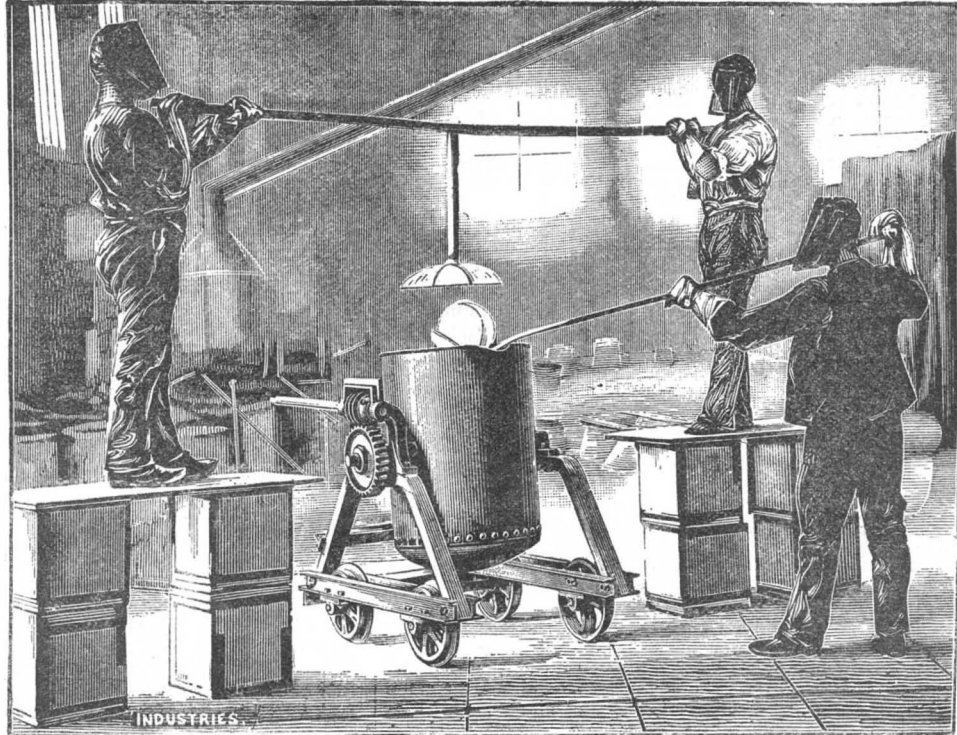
INTRODUCING SODIUM INTO MOLTEN CRYOLITE.
